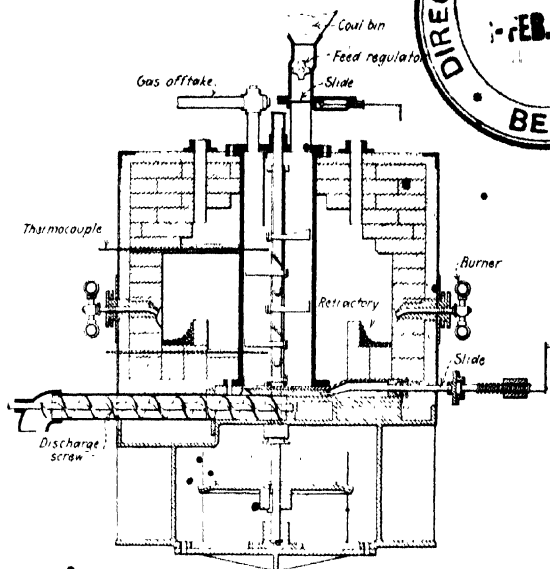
VERTICAL RETORT, WITH SINGLE PADDLE SHAFT
